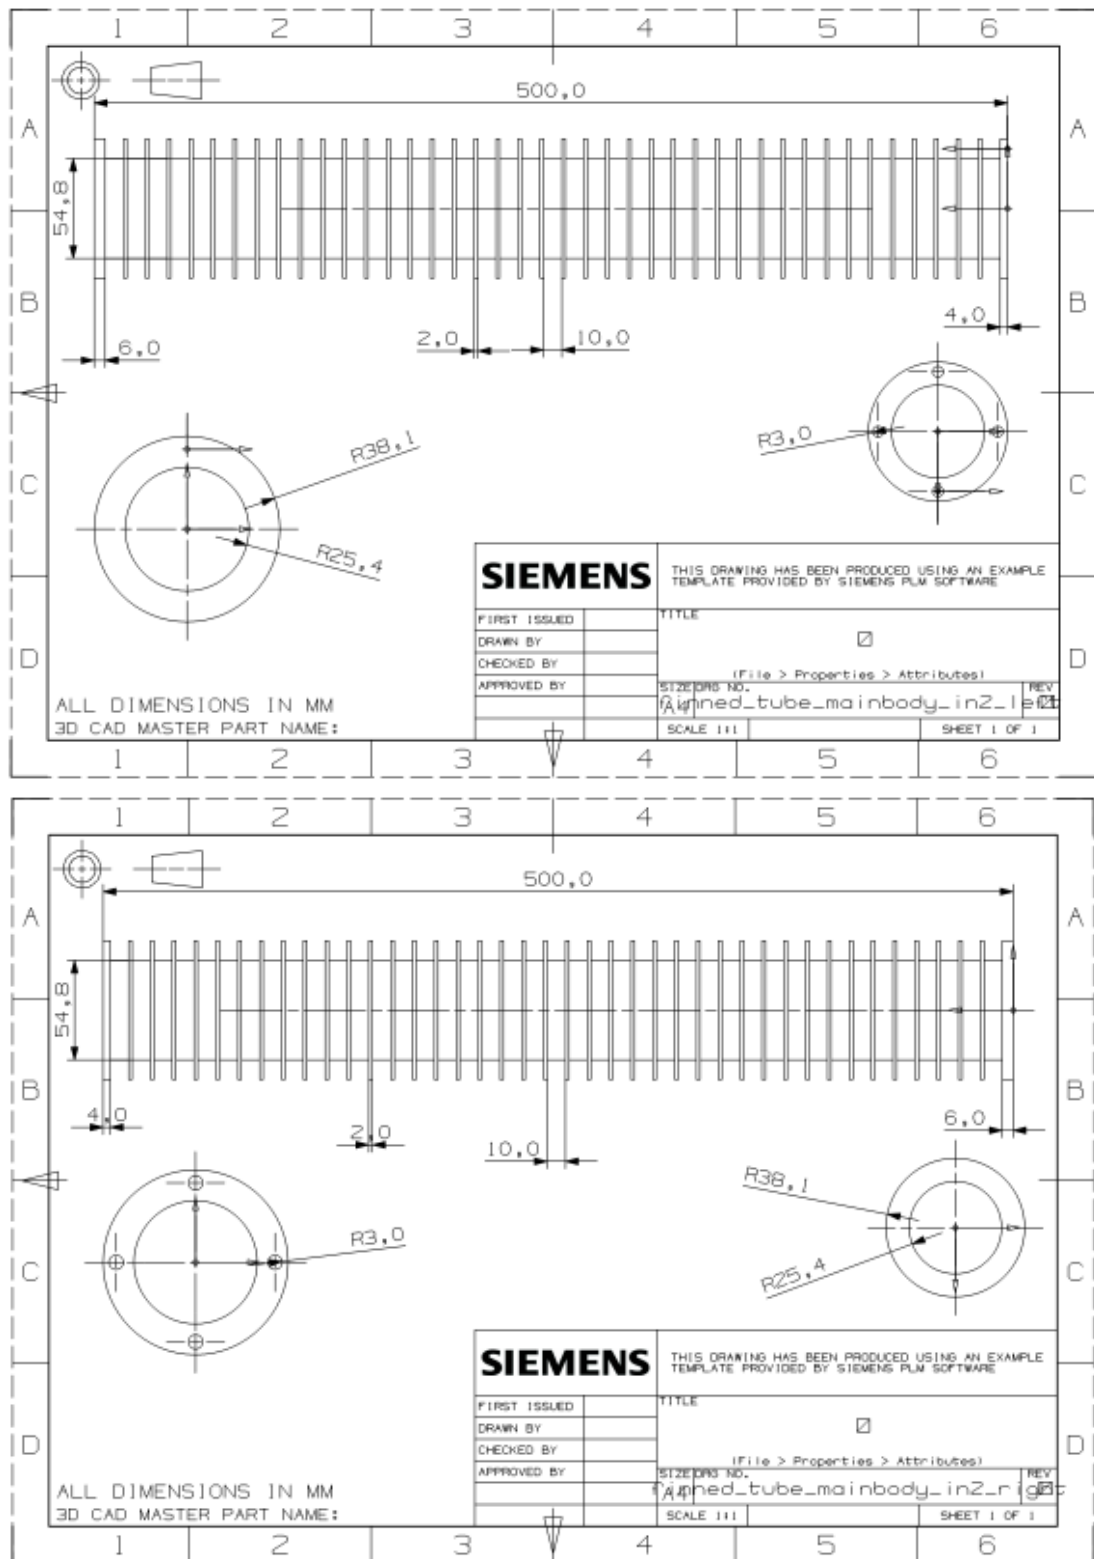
Finned tube engineering drawings. Left hand (top), right hand (bottom) (Couch, 2011).
